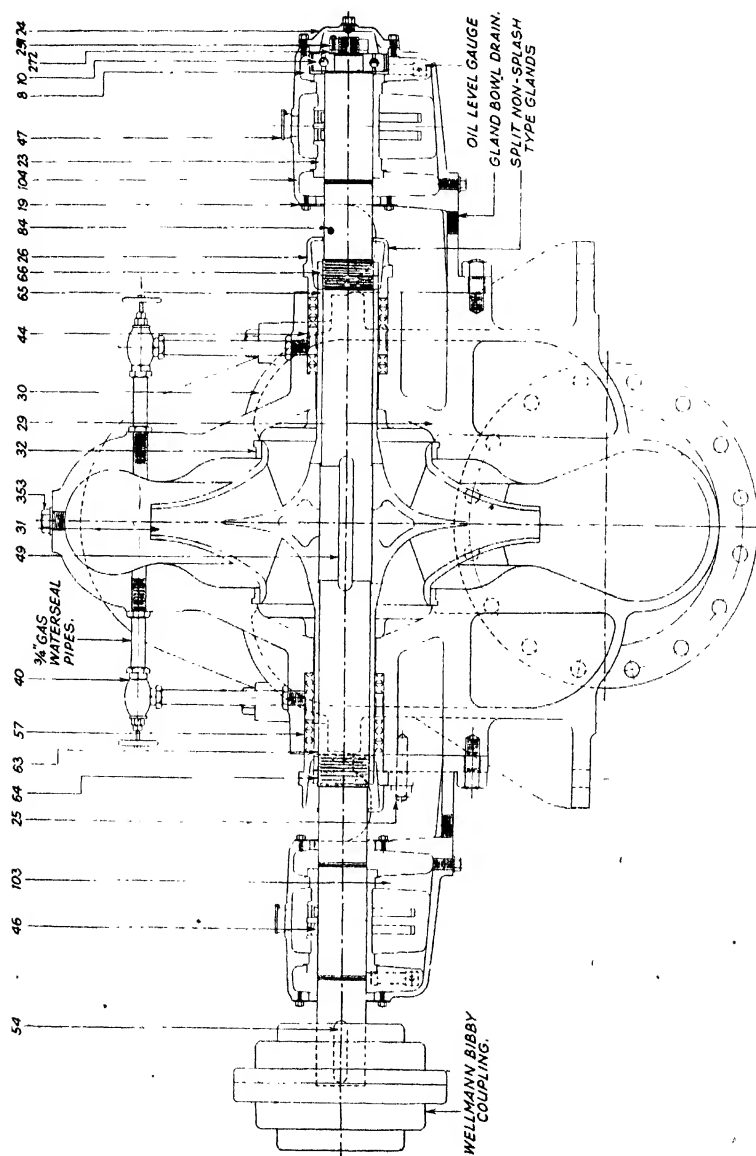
SECTION THROUGH GENERAL-PURPOSE PUMP
